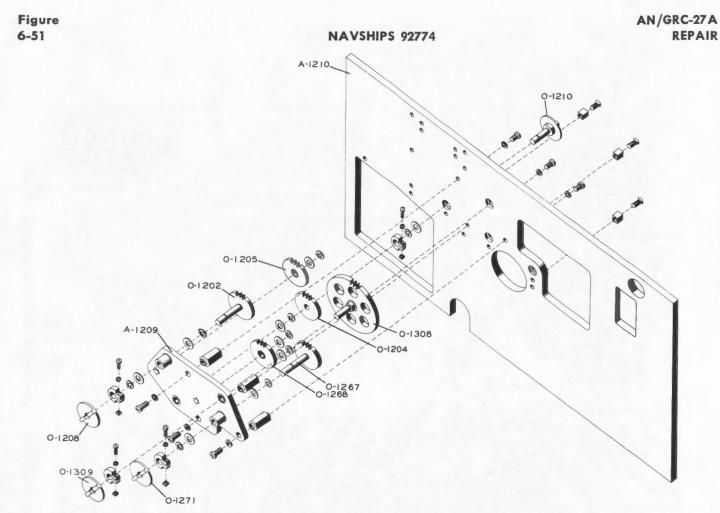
Radio Receiver R-278B/GR, Front Gear Drive
